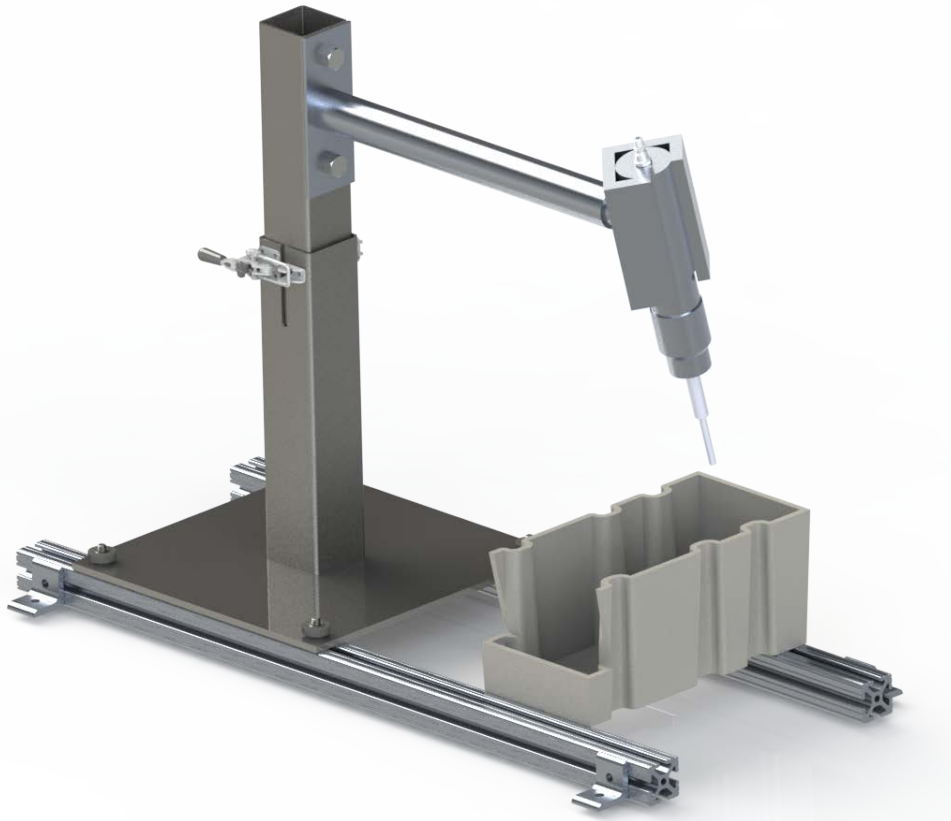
Isometric Render of the Sliding Tool Holder
